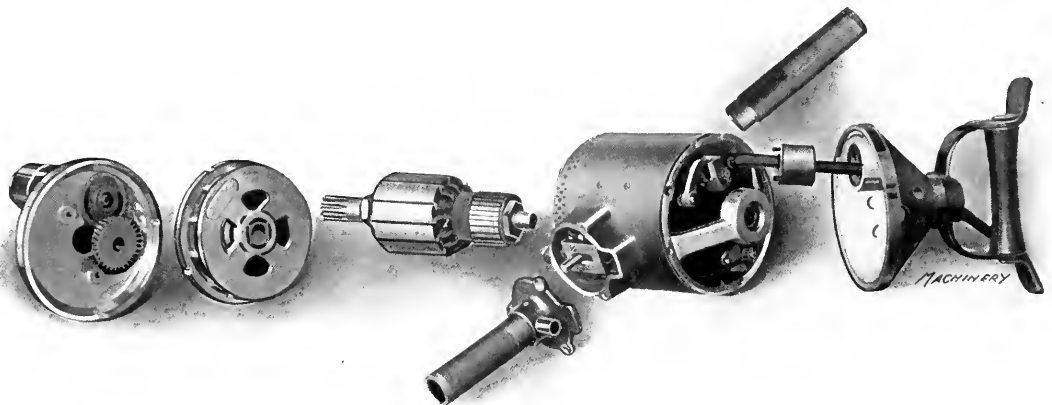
Parts of a Hisey-Wolf Universal Drill
